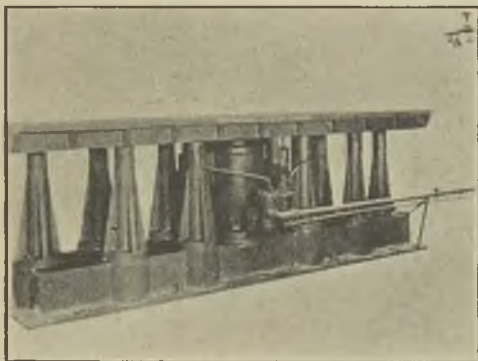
A NO. 20 AJAX MACHINE FOR LAMP POSTS, ETC.
